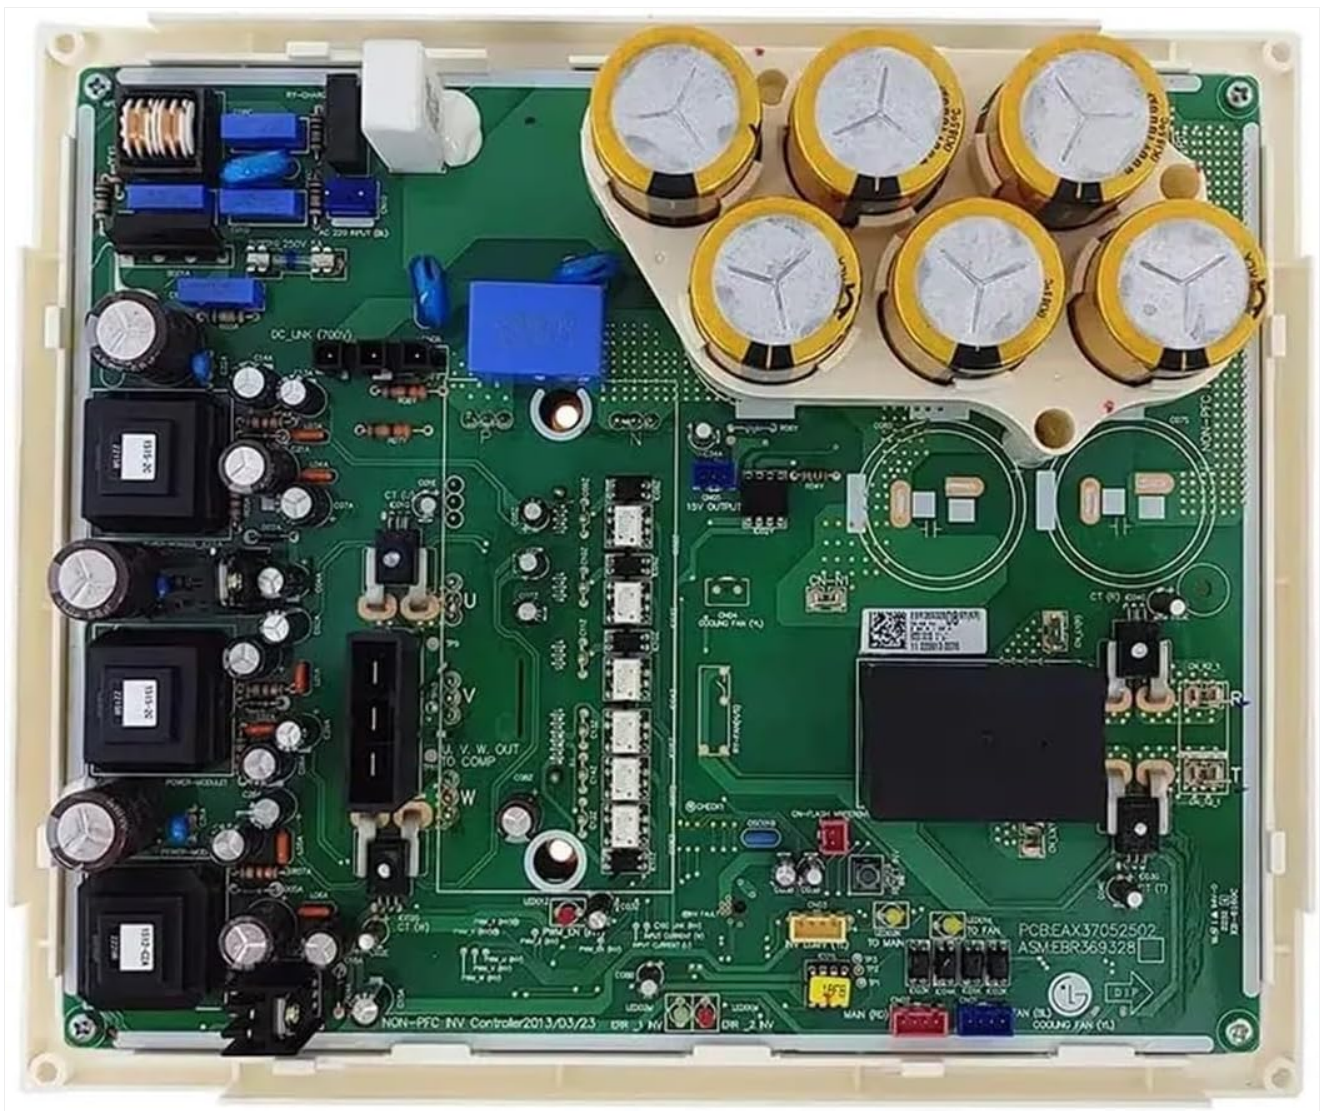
Top view of the XCHANG Outdoor Inverter PCB Assembly (EBR36932808 / EAX37052502). This image shows the layout of various electronic components, including capacitors, resistors, and integrated circuits, mounted on the green circuit board.
